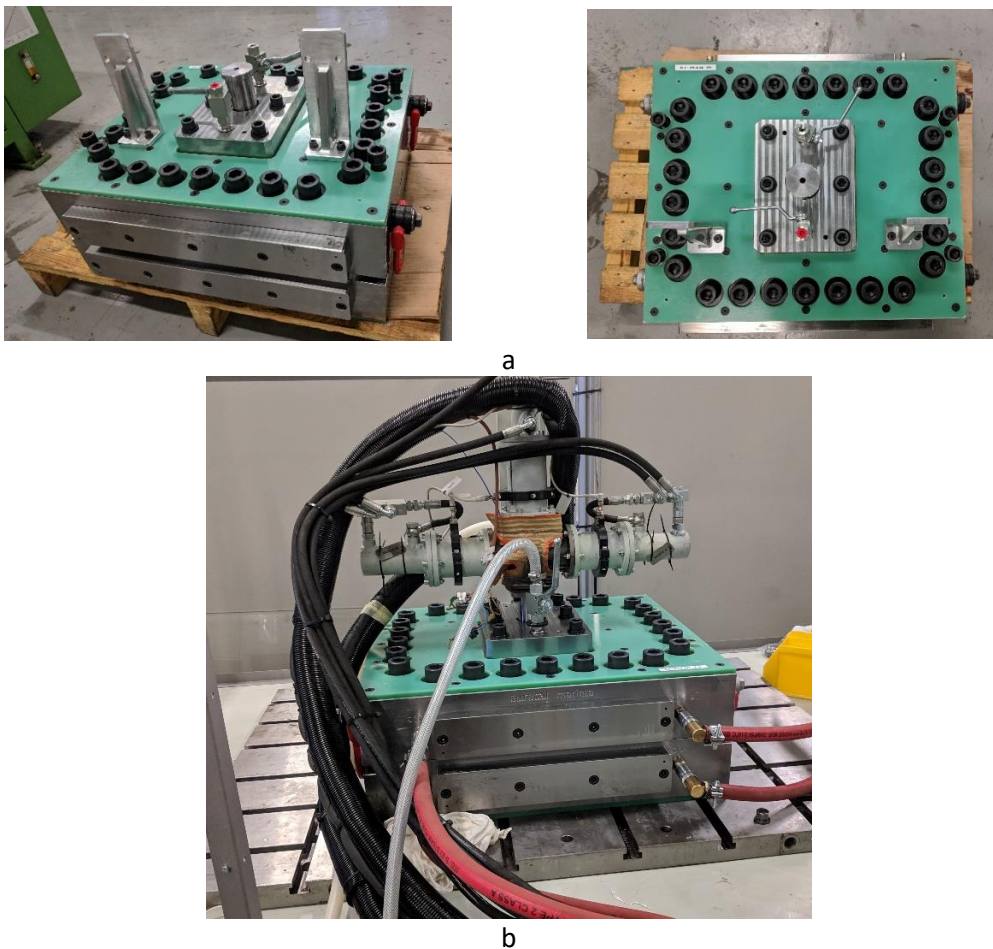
Mold construction. a) Detail of the mold structure. b) Detail of the machine mixhead integration and the heating and vacuum connections (configuration for bi-component injection)
